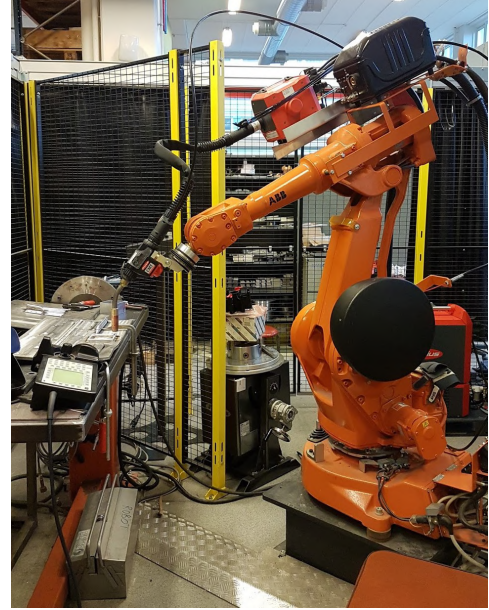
Experimental set-up: 6 DOF ABB IRB2400/10 robot manipulator with welding equipment from Fronius.
